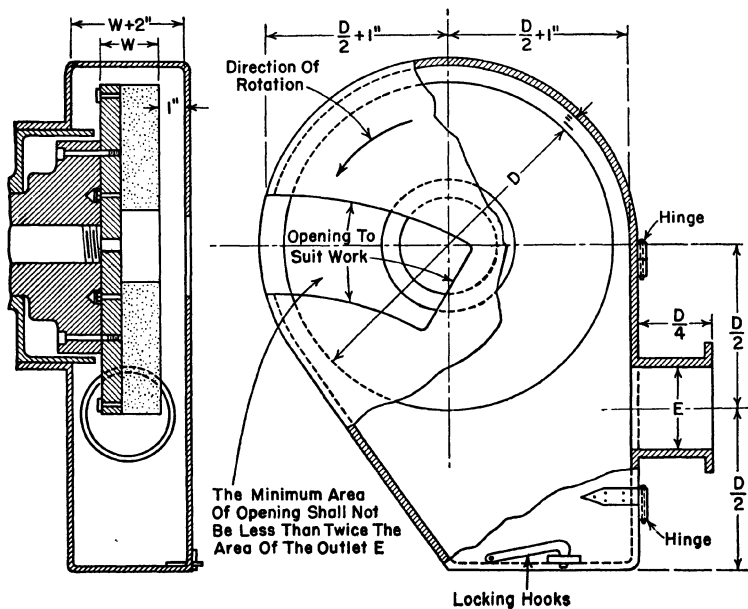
Horizontal Single-Spindle Disc-Grinder Exhaust Hood (Courtesy AFA)
